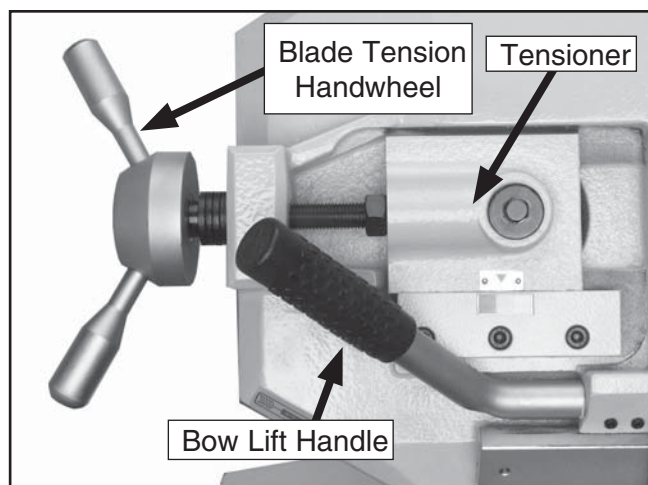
Blade tension handwheel, tensioner, bow lift handle.
